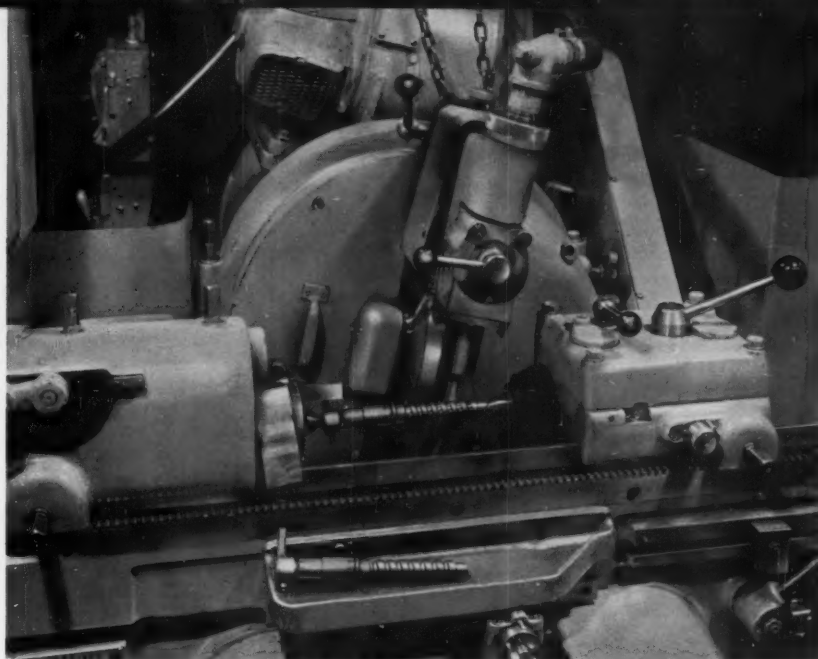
Former cams are employed on this grinding machine to develop the specified taper of 0.003 inch per inch from thread center toward both ends of the worm.
